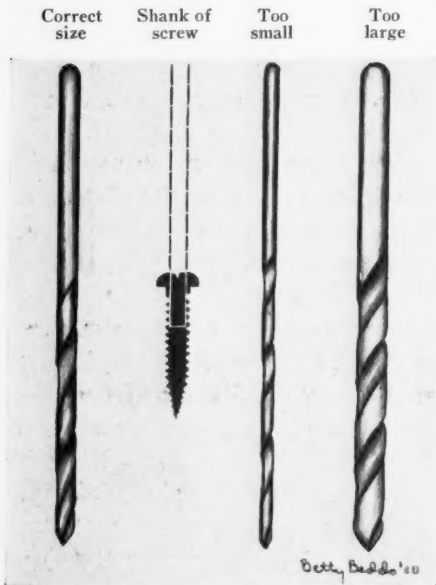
Diagram demonstrating correct size of drill to use in making screw-hole. Drill must be exact diameter of the shank of the screw.
